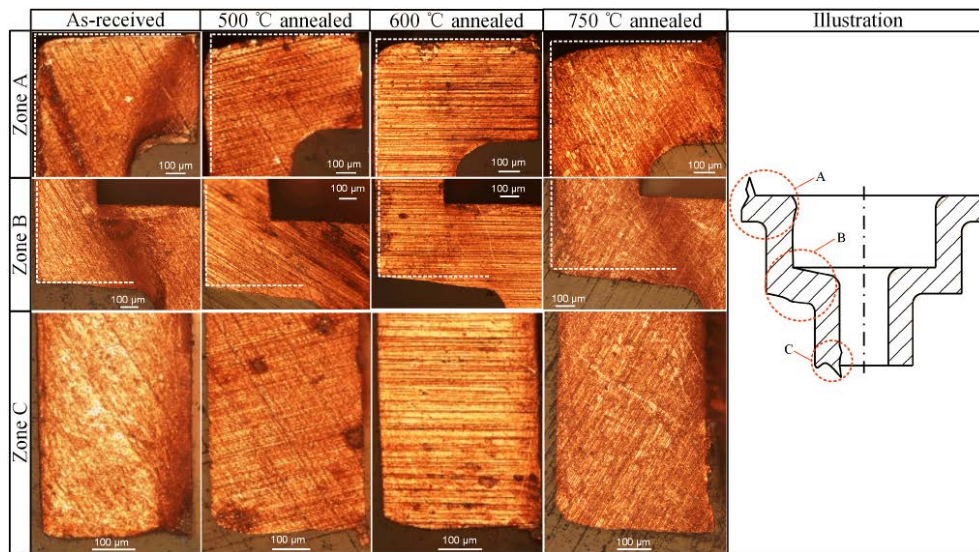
Geometrical features of the flanged part produced by progressive forming [112].
